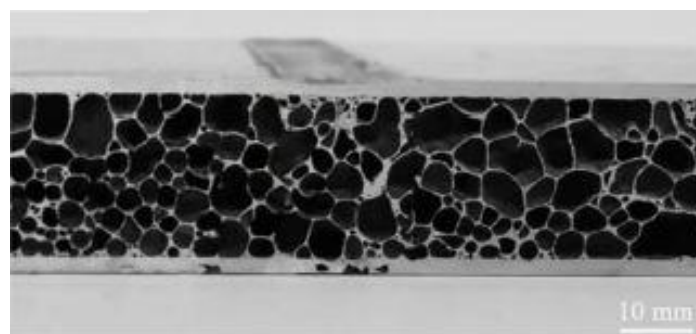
Cross-section of a friction-stir-welded AFS [32]
